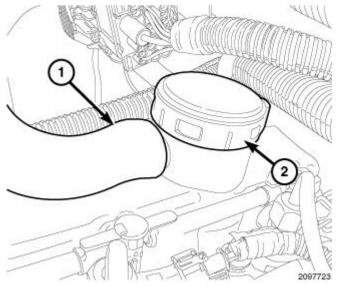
Oil Separator Cover Courtesy of CHRYSLER LLC
